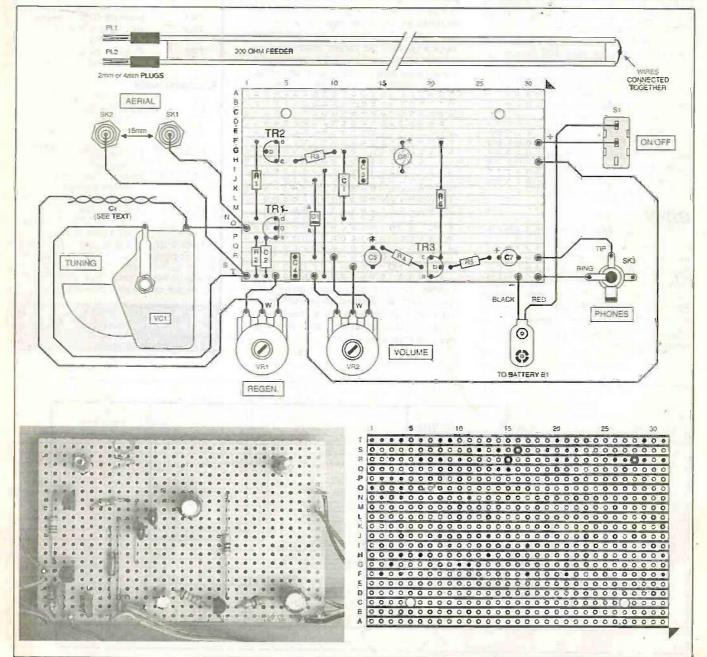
Stripboard component layout, off-board interwining and board underside showing breaks in copper tracks. "Loop" aerial details are shown at the top and the completed board above.
